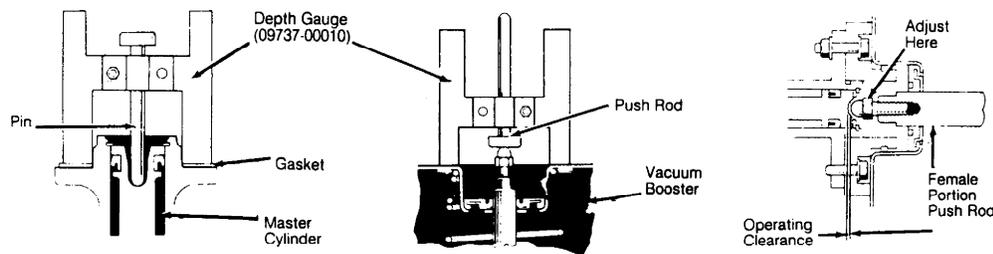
Measuring Clearance Between Master Cylinder & Power Assist Servo
